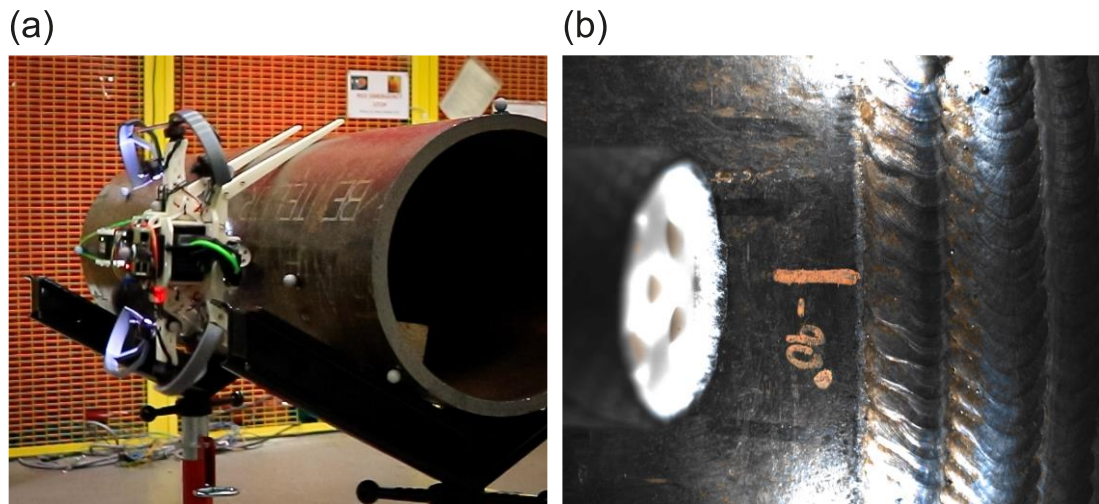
Synchronised photographs of the fly-crawl-fly inspection. These show: (a) the vehicle and (b) an unprocessed inspection image captured while in motion passing the -90° clockface angle.
